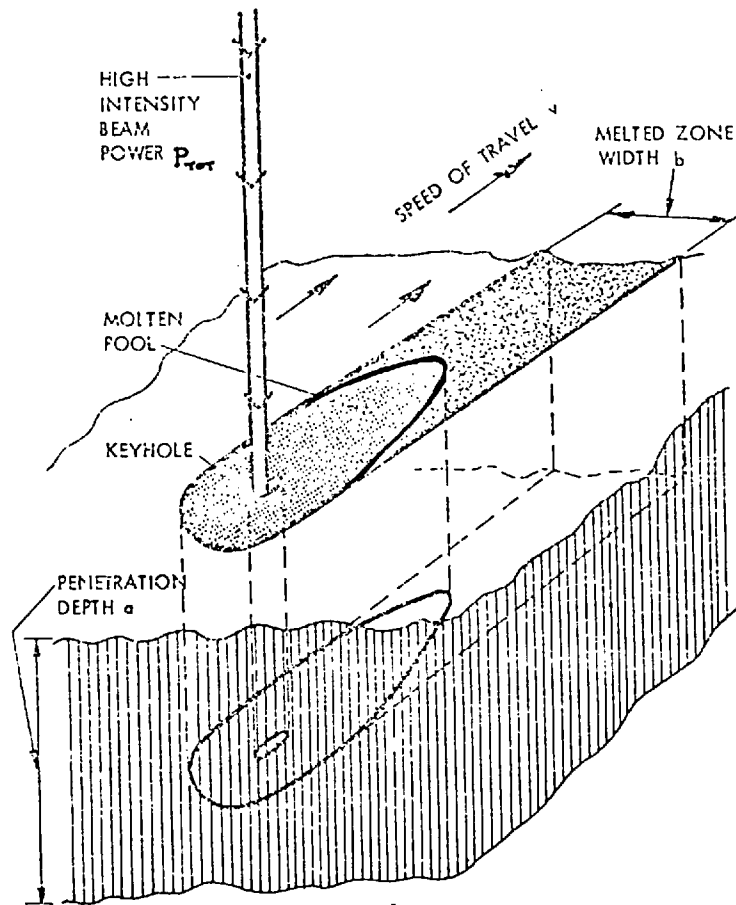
Penetration weld geometry (Ref. 9)
